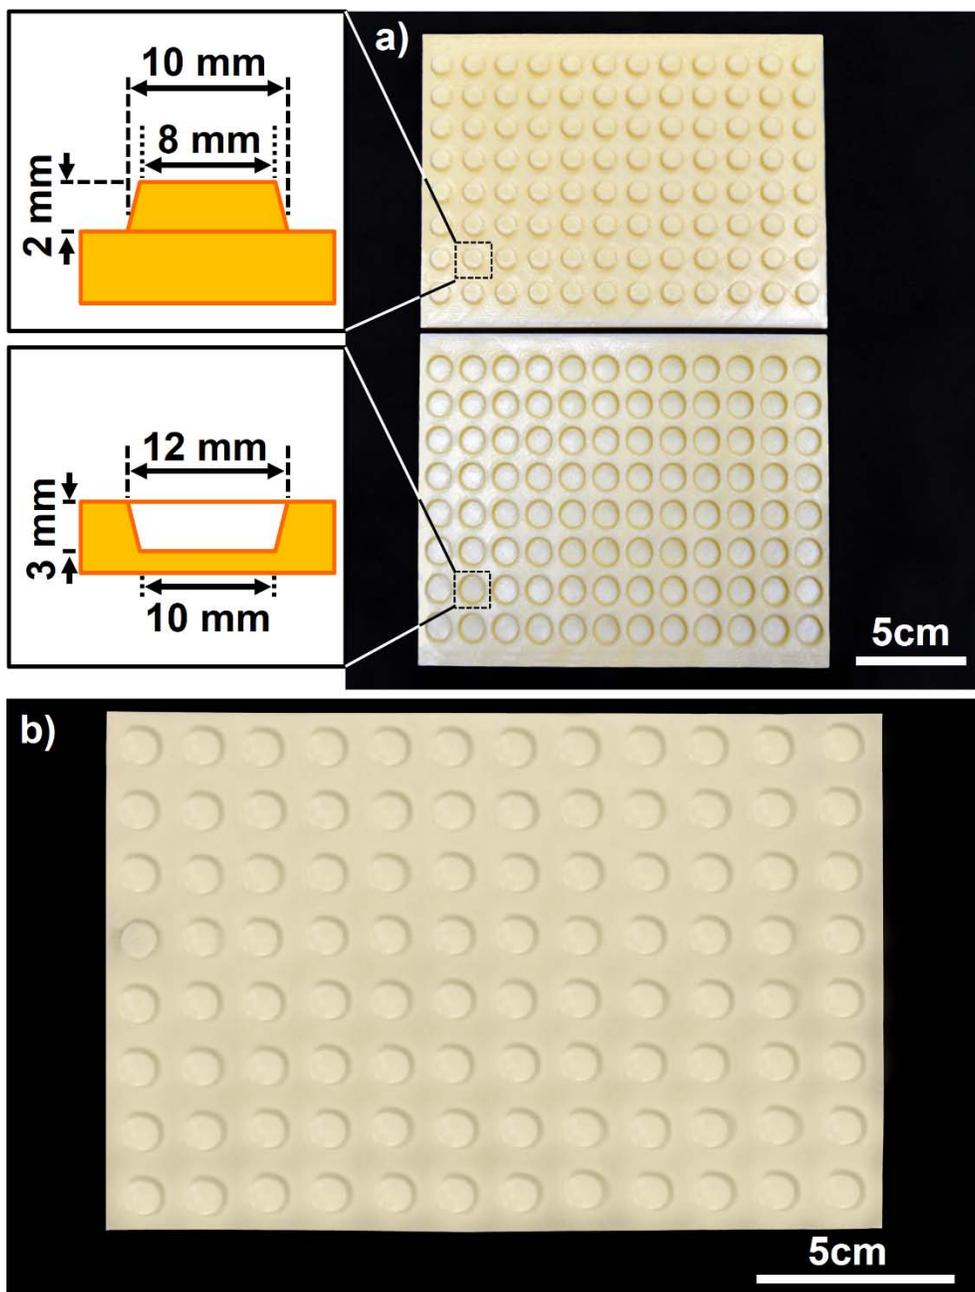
a) Schematic descriptions of the dimensions of the dies used to fabricate a 96 well plate. Pictures of the ABS dies are shown on the right. b) Whatman #5 paper embossed with the dies shown on a).
